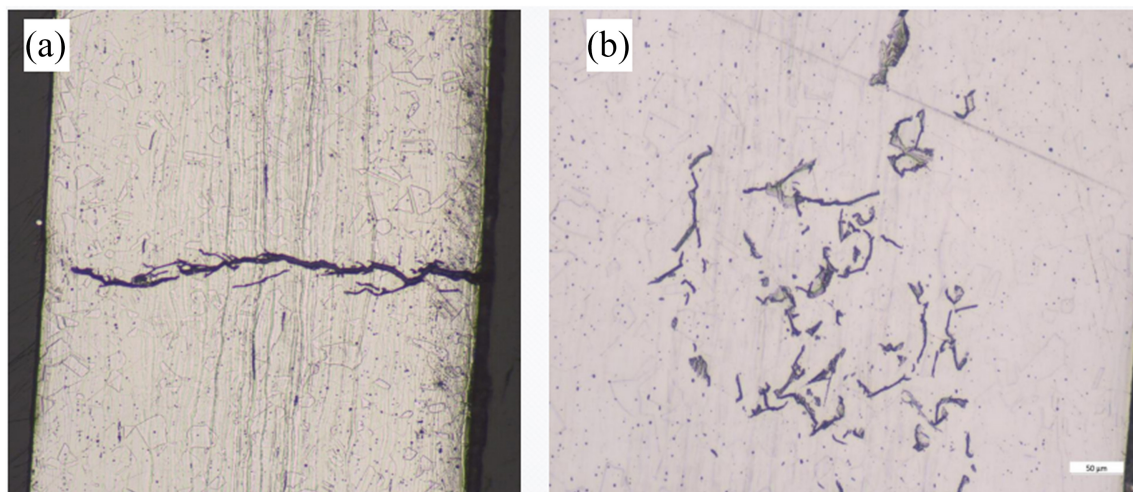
Metallographic morphology of crack defects in cold rolled sheet; (a) Longitudinal section morphology; (b) Cross section morphology
